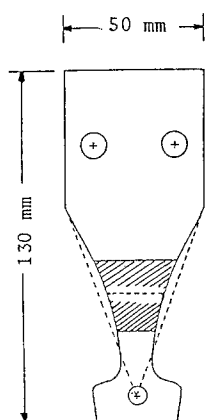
The shape and dimensions of the corrosion fatigue specimen.
